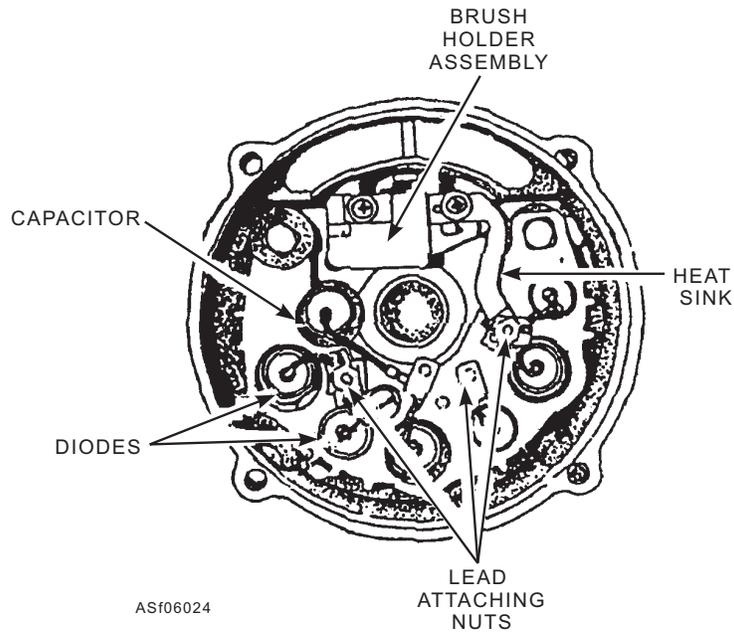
View of an ac generator slip ring end frame assembly.
